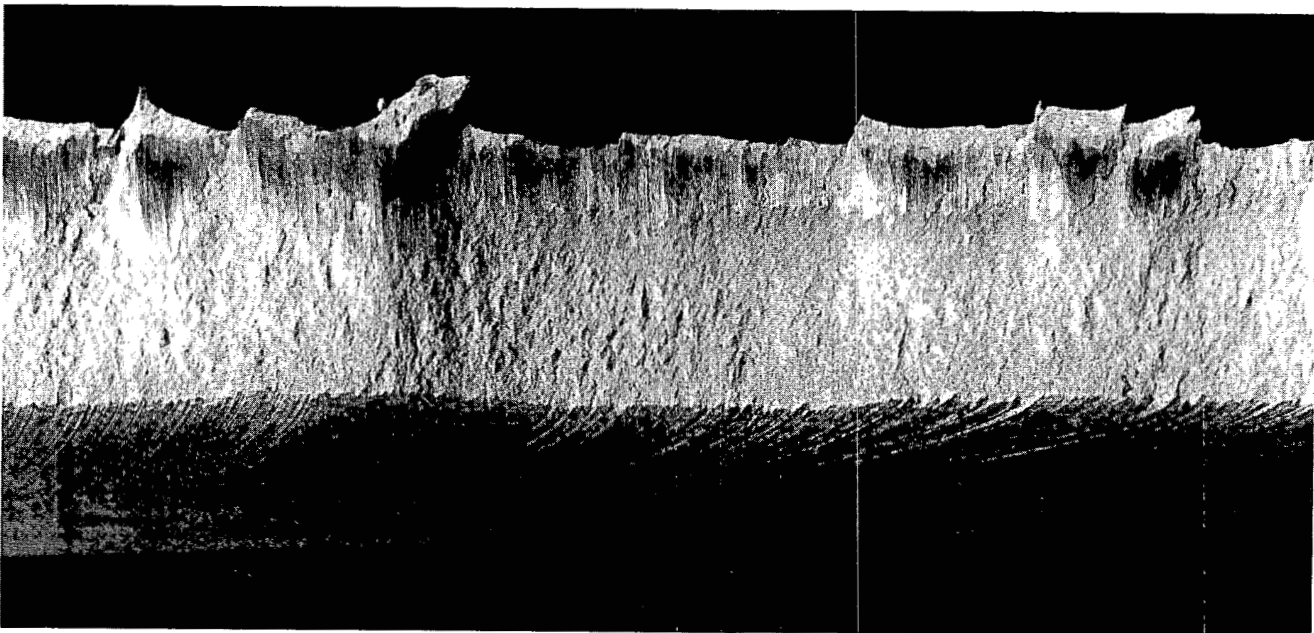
Fracture Face of Ductilely Torn A516 Plate Made by Low Sulfur Practice with Inclusion Shape Control
